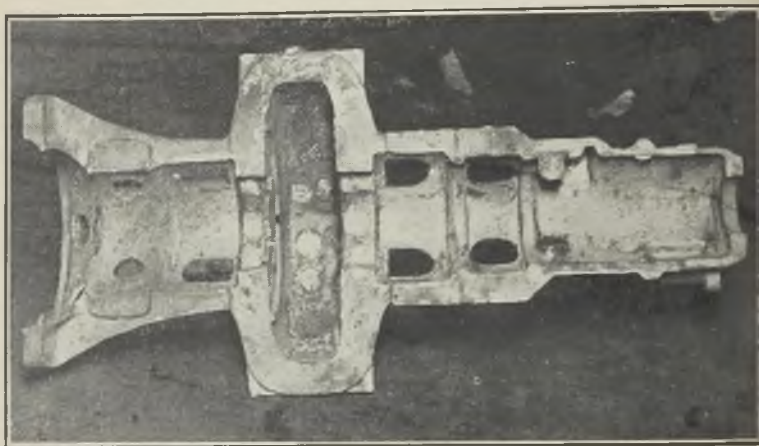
INTERIOR ASPECT OF THE CASTING SHOWN IN FIG. 10.
